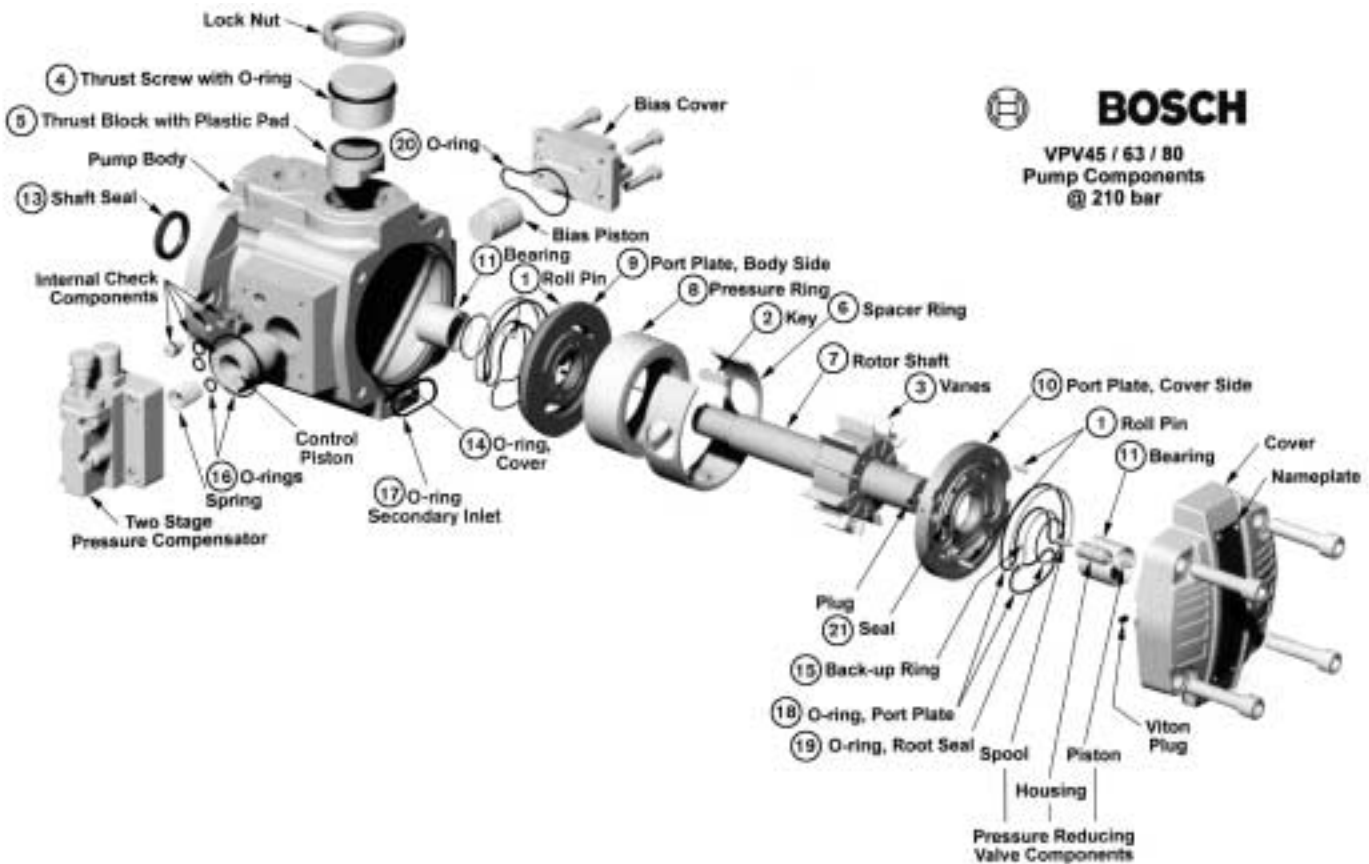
Pump Components with numbered Repair and Seal Kit Parts
